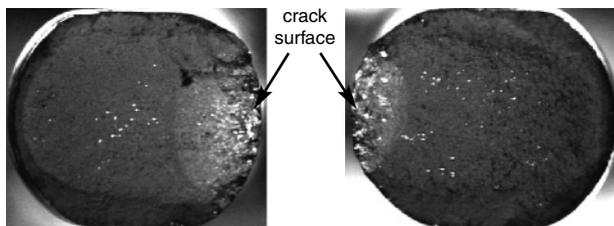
Fracture surface photographs for (a) an 8 kN loading test, and (b) a 14 kN loading test. The karabiner cross-section is 1 cm × 0.8 cm. The crack initiates from the inside of the karabiner. The crack surface is the light oval patch
